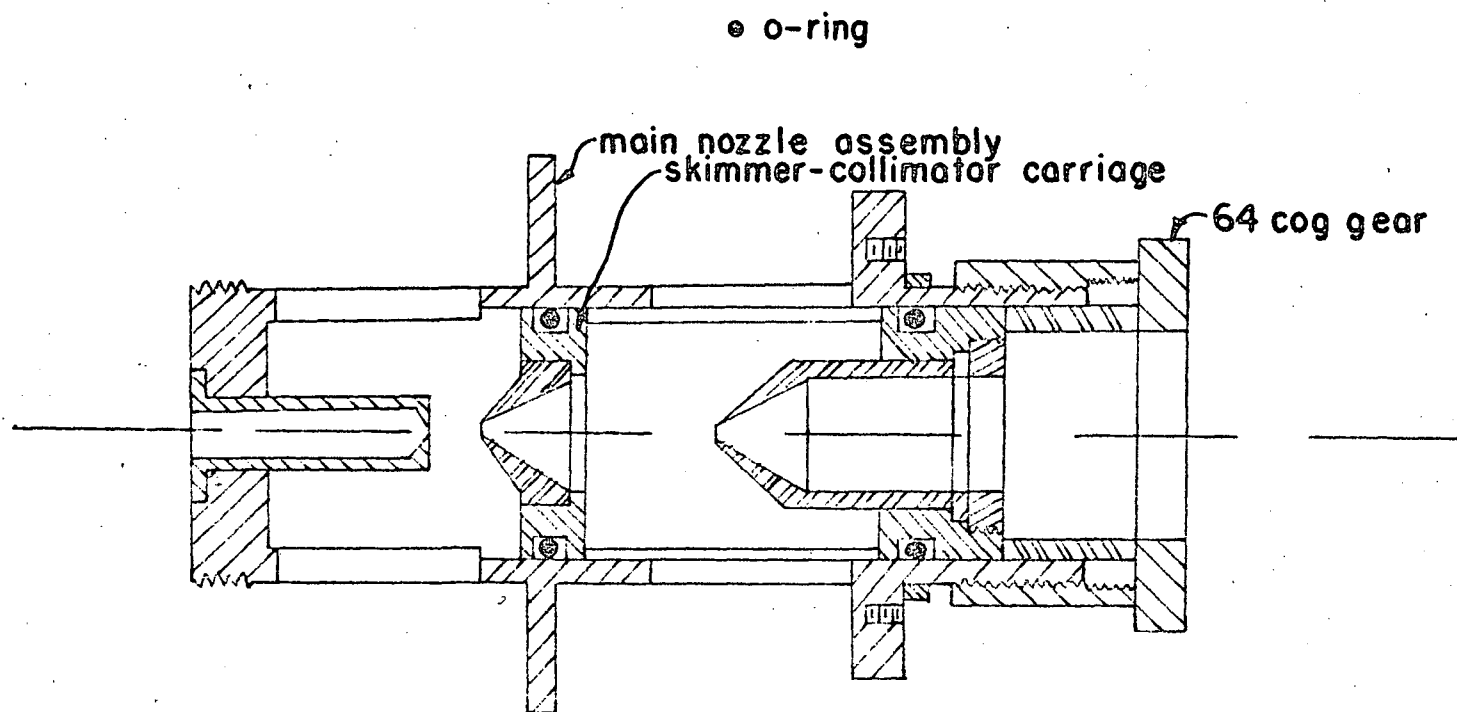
The Adjustable Nozzle-Skimmer Assembly.
